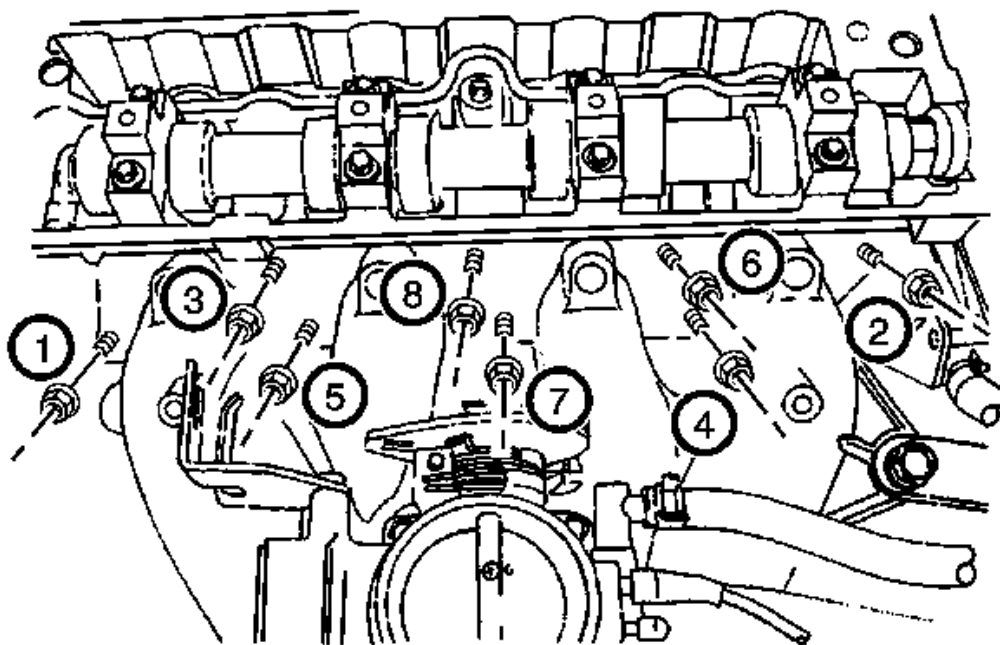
View Of Intake Manifold Retaining Bolt Removal Sequence
